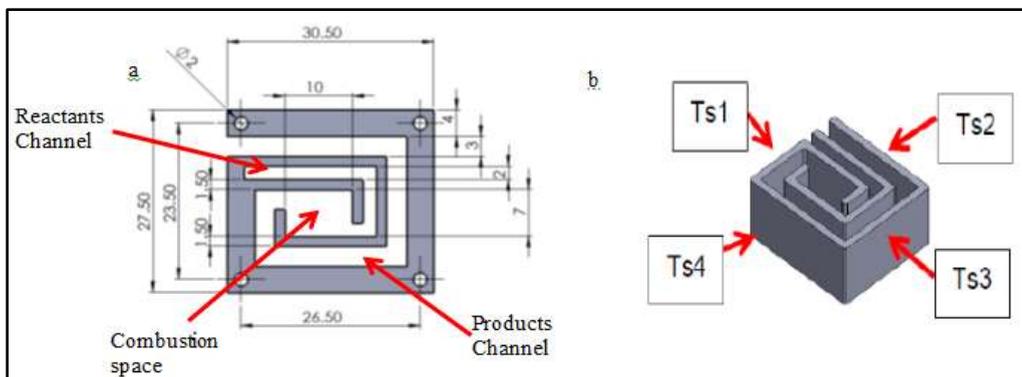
Model of one turn Swiss roll combustor (a) dimensional details of channels and combustion space; (b) surface temperatures on surfaces 1 through 4 in sequence [2]
